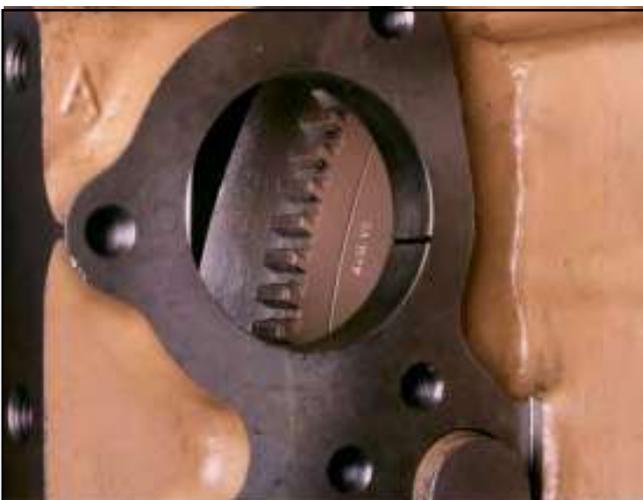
Valve set marks on right bank flywheel and housing — KT/KTA 2300
